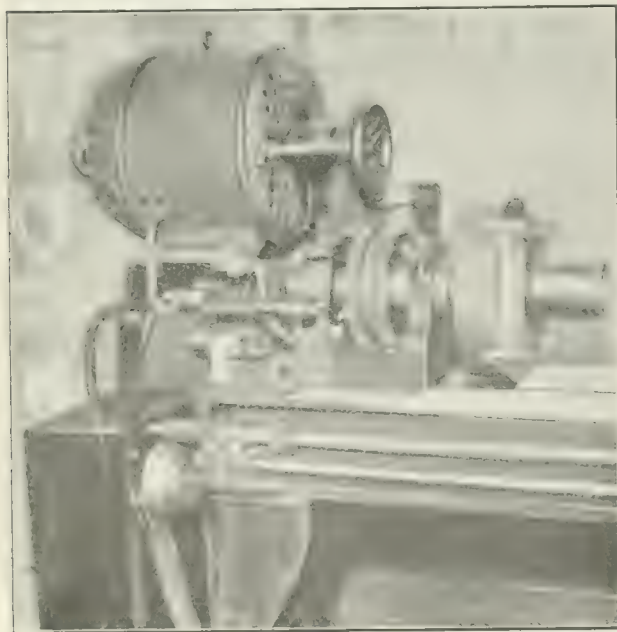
An 18 In. Lathe Changed from Belt to Motor Drive by the Application of a 30 Hp. Motor Built by the Reliance Electric & Engineering Company, Cleveland, Ohio.
